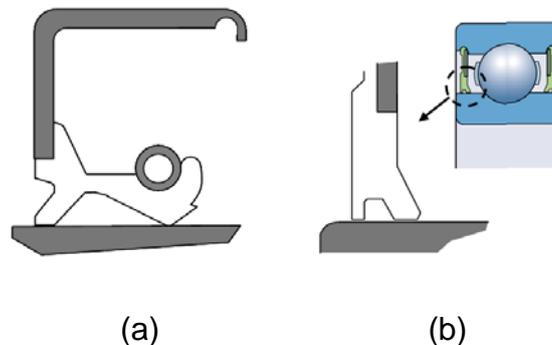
Left, wide seal pocket and right, narrow seal pocket
